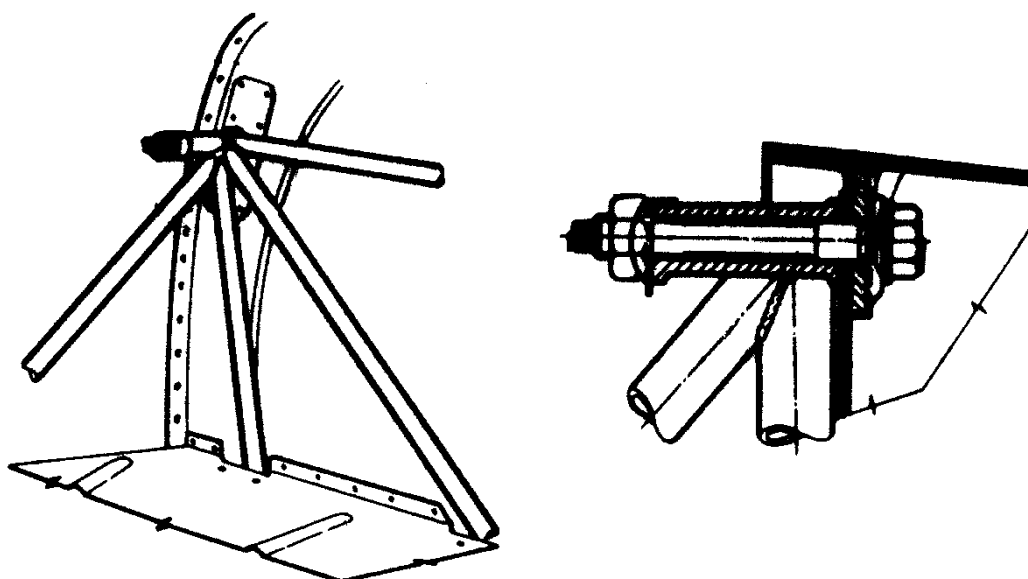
; Connection of fuselage front and rear part of the Z 242L aircraft
